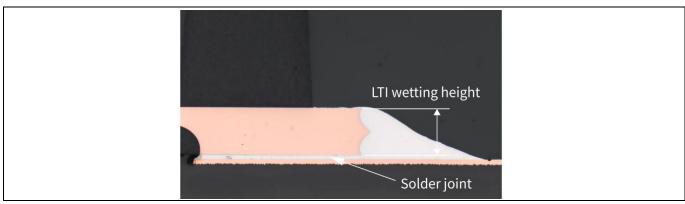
Cross section of a DFN no-lead termination with hollow groove LTI. The wettable tip enables the formation of a solder fillet that can be insepected by AOI.
